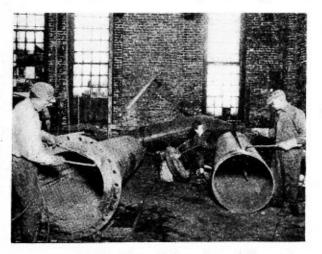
Welding Three Different Parts of Heaters
